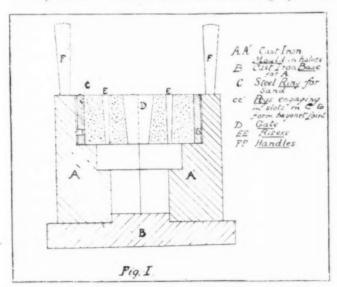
A MOLD MADE WITH SMALL HEAD AND RISER.
